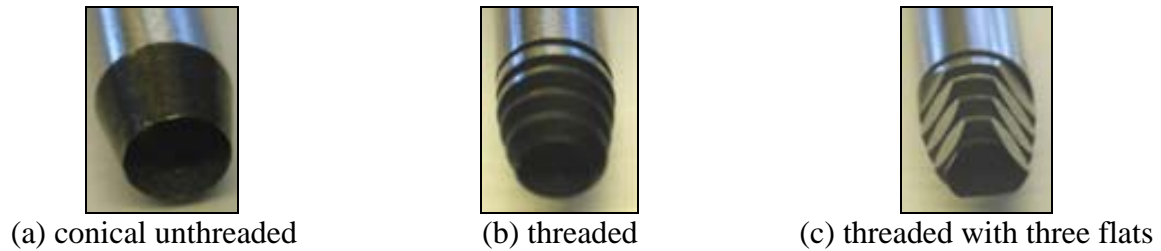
FSW tool pin geometries investigated by Zettler *et al.* [46]
